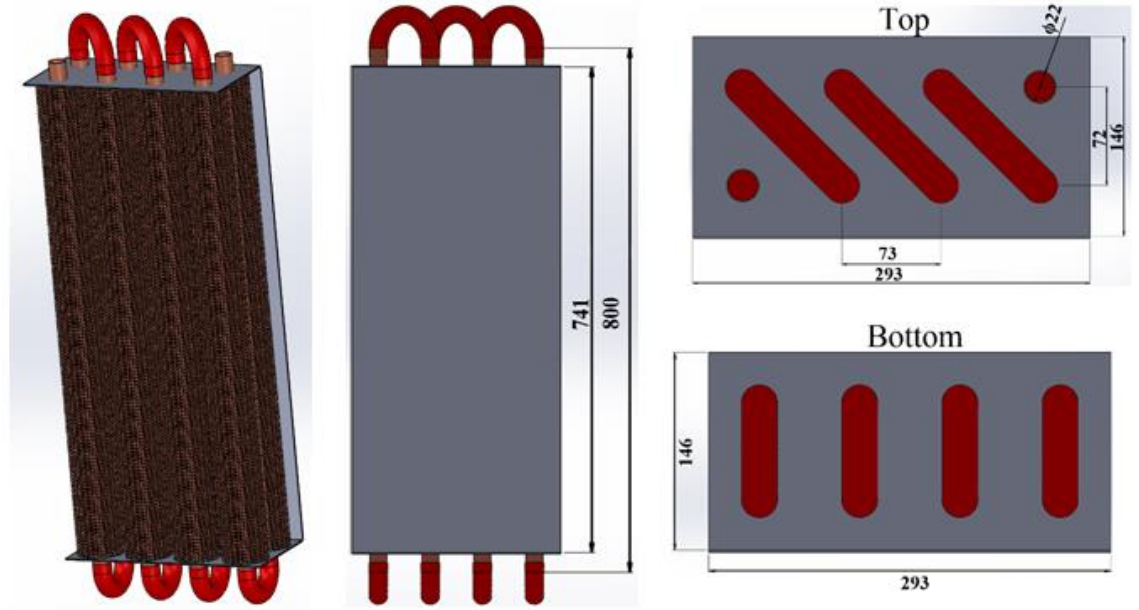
3D drawing in mm for PCM HX – Isometric (left) – front (middle) – top and bottom (right)
